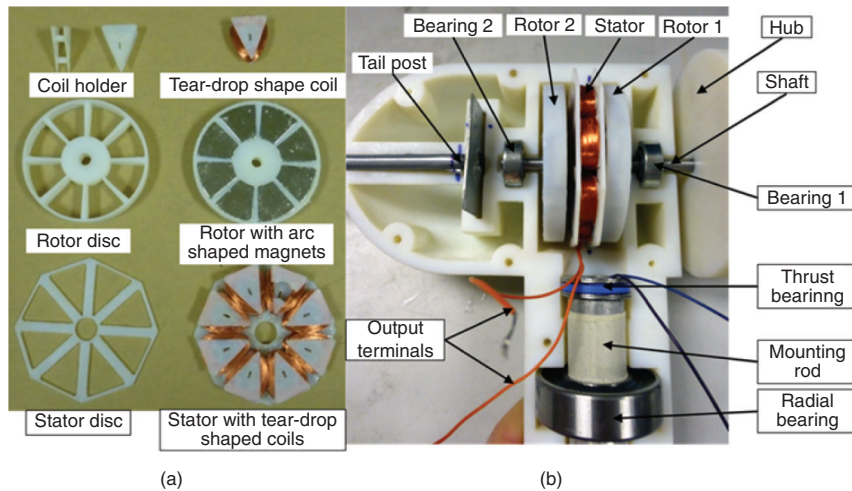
Axial flux generator design for SWEPT: (a) fabricated stator and rotor parts showing the shapes of the magnets and coils and (b) axial flux generator inside the nacelle box
